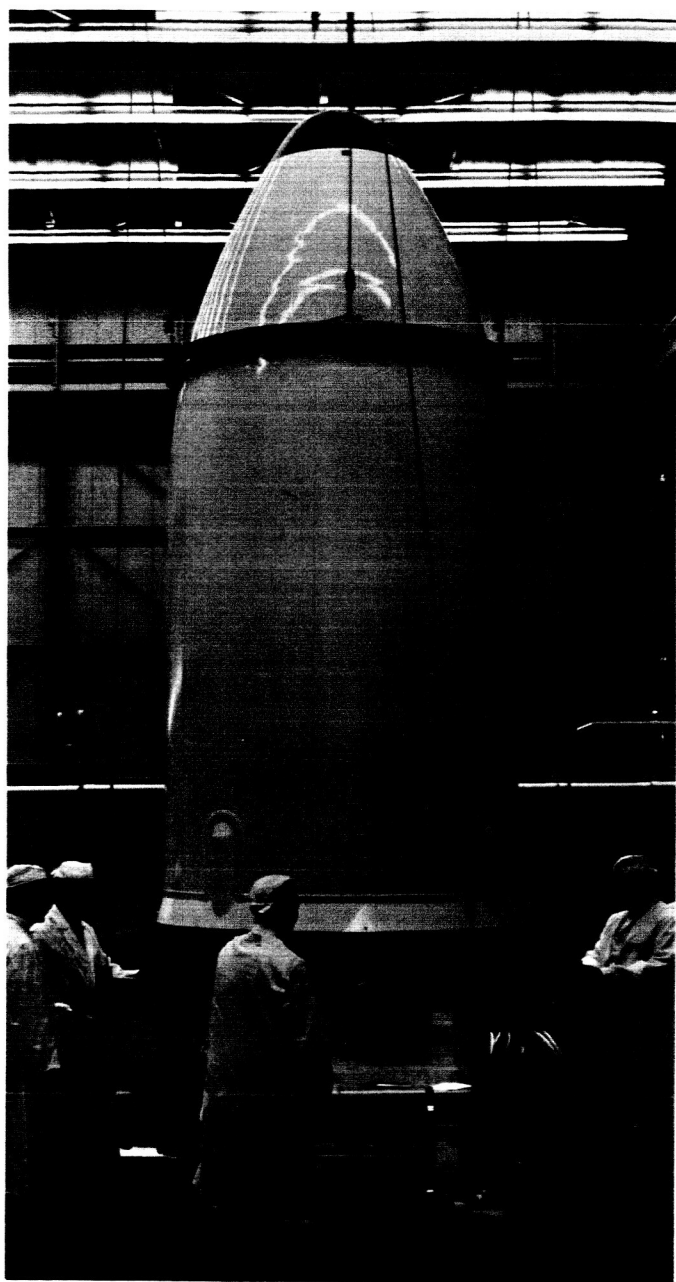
Encapsulated shroud-spacecraft system being removed from trailer
